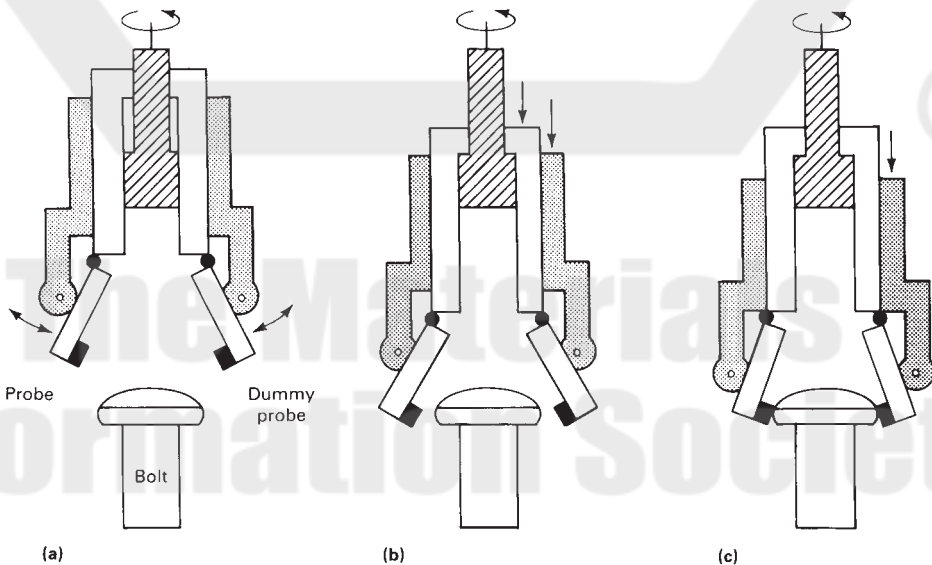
Operation of rotating eddy current detection head. (a) Shear bolt positioned under rotating detection head. (b) Rotating detection head descends to lower probes into position to inspect bolt head. (c) Probe scans bolt head as bolt undergoes two complete revolutions to detect flaws. Source: Ref 2
